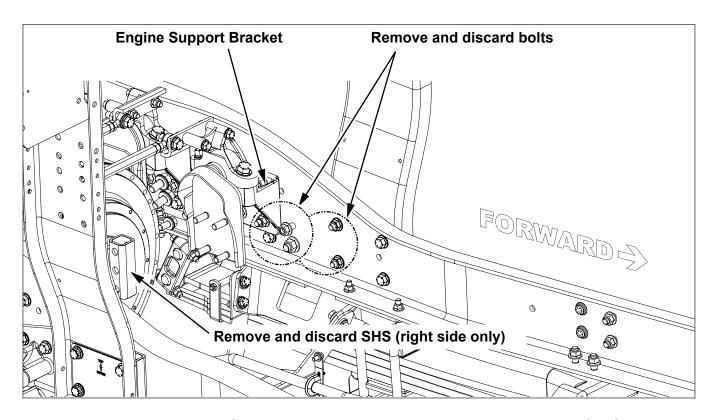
, With Engine Support Bracket - Inside View - Engine Hidden for Clarity
